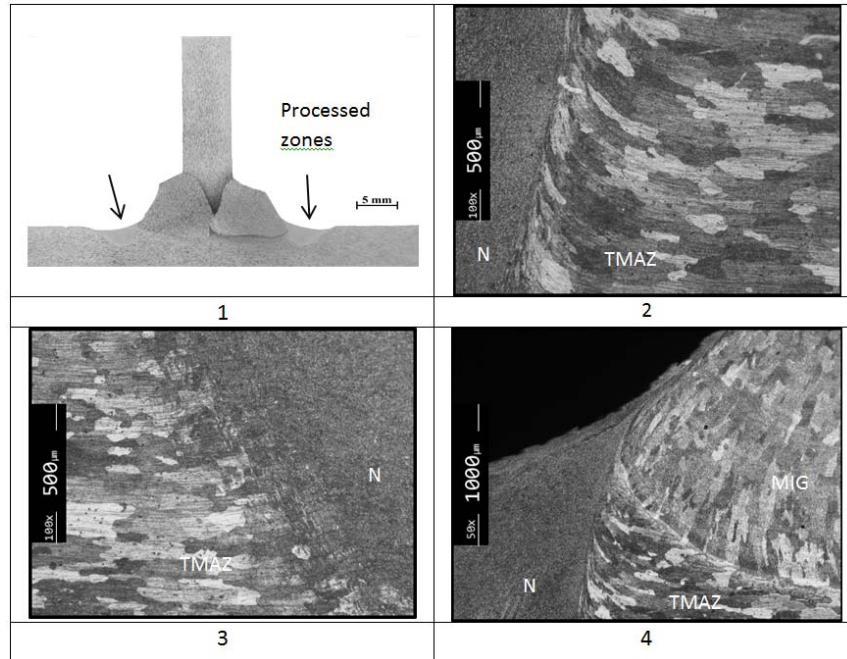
MIG weld made on AA 6082-T651 and processed with Tool E; 1) Macrograph; 2) Advancing side of stir zone; 3) Retreating side of stir zone; 4) Toe region.
